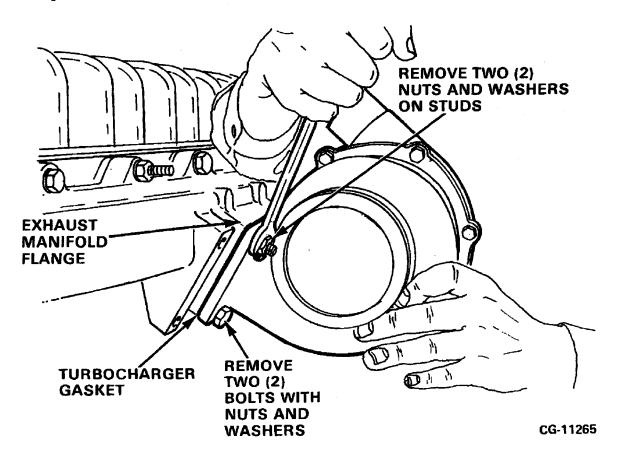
Removing Turbocharger Assembly from Exhaust Manifold
